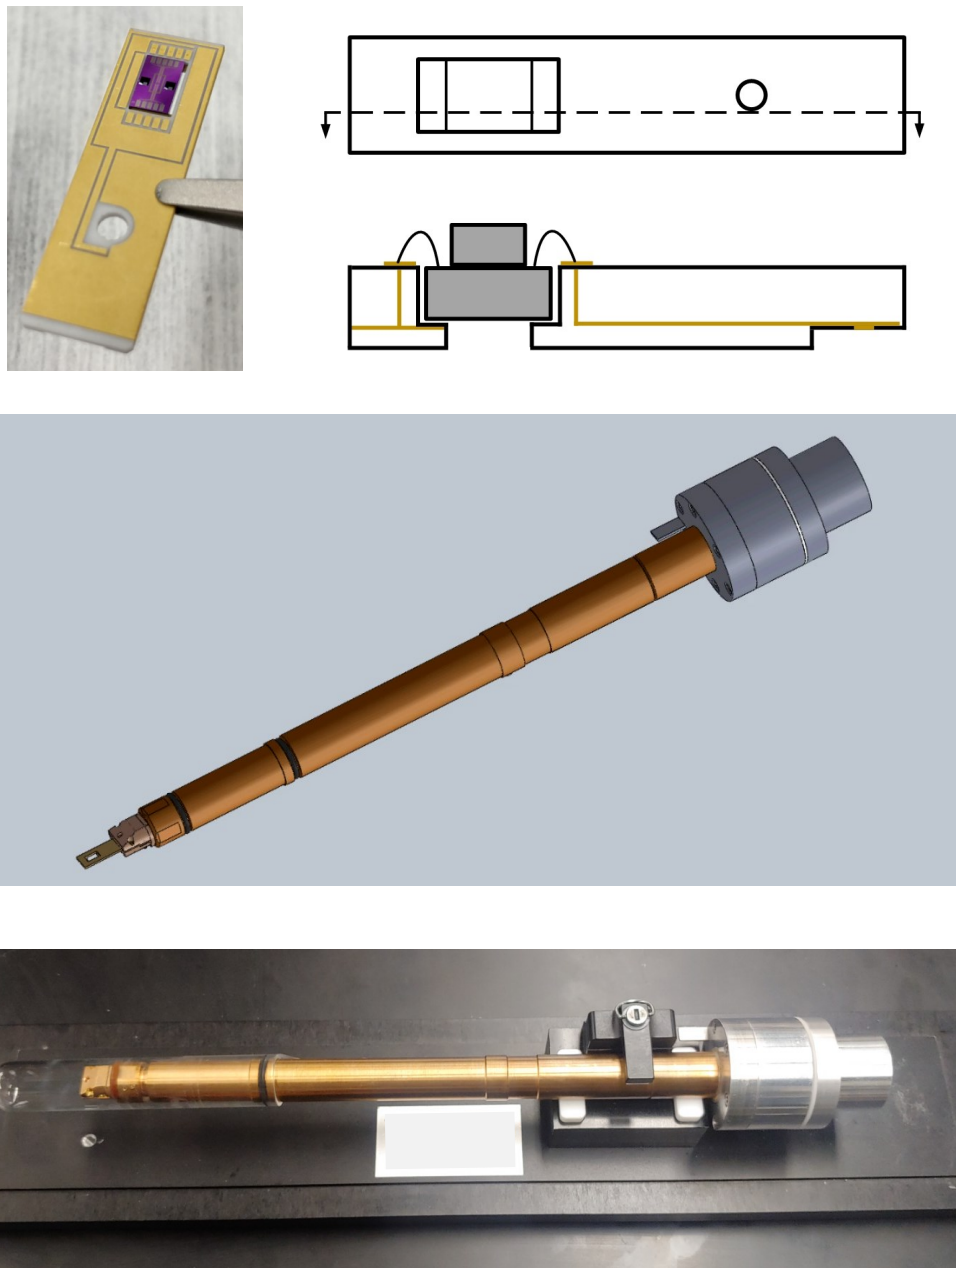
Top figures show close up of ceramic chip carrier and cartoon schematic of side view of liquid cell sitting inside the holder. Middle and bottom figures show the entire holder assembly.
